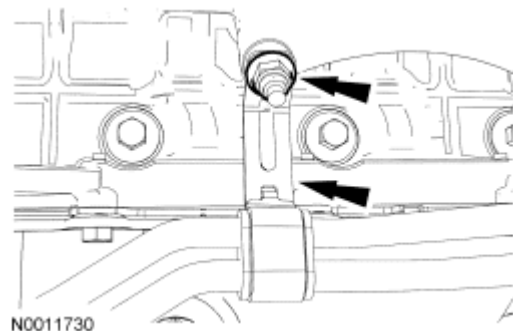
Locating Transmission Cooler Tube Bracket And Nut
